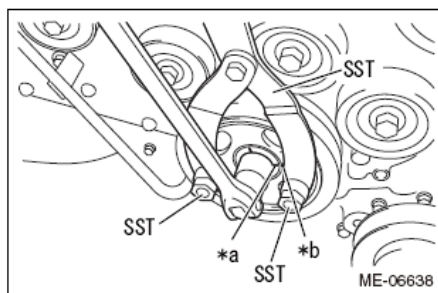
Identifying Crankshaft Pulley Reference Line And End Line
